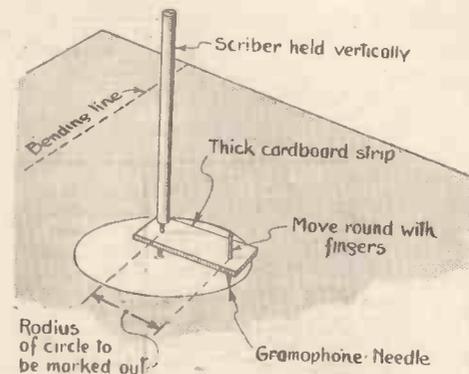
Hole-scribing for valve holders in metal holds no terrors if you make up this little cutter with cardboard and needles
